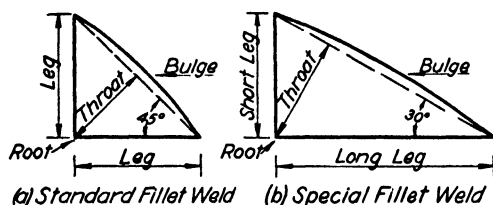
THROAT ON CONTROLLING DIMENSION OF FILLET WELDS.
